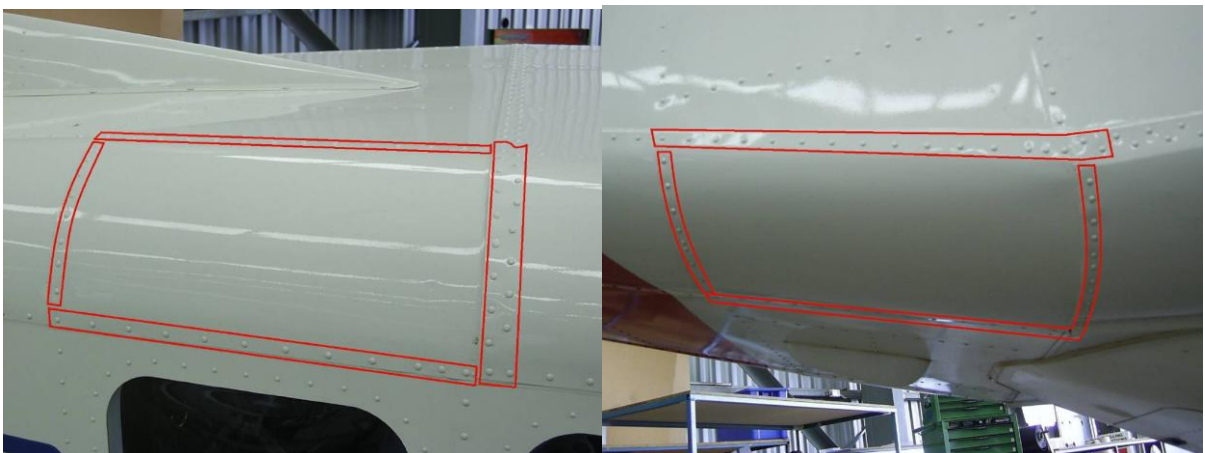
Remove rivets from Right (Starboard) side upper and lower outside corner panels and remove these panels ONLY.
